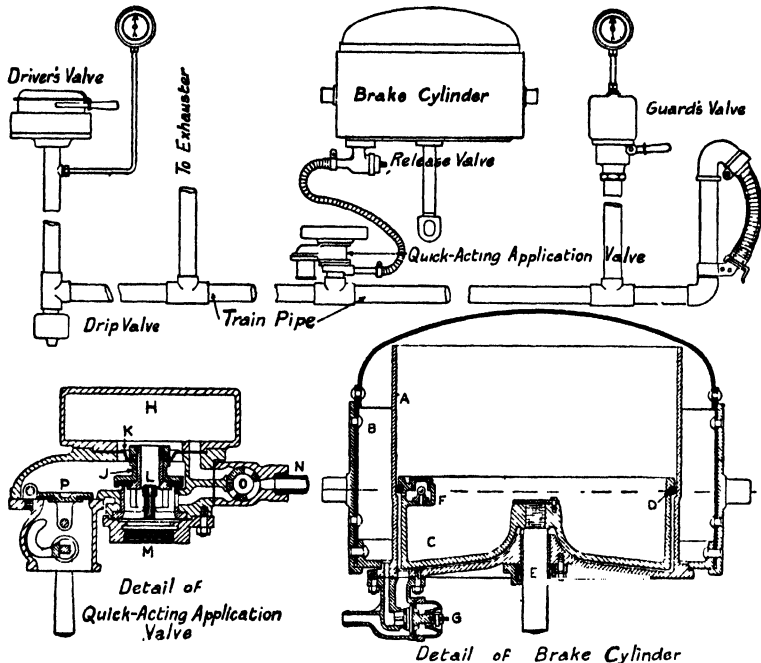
GENERAL ARRANGEMENT OF ESSENTIAL PARTS OF VACUUM BRAKE (VACUUM BRAKE CO.)
